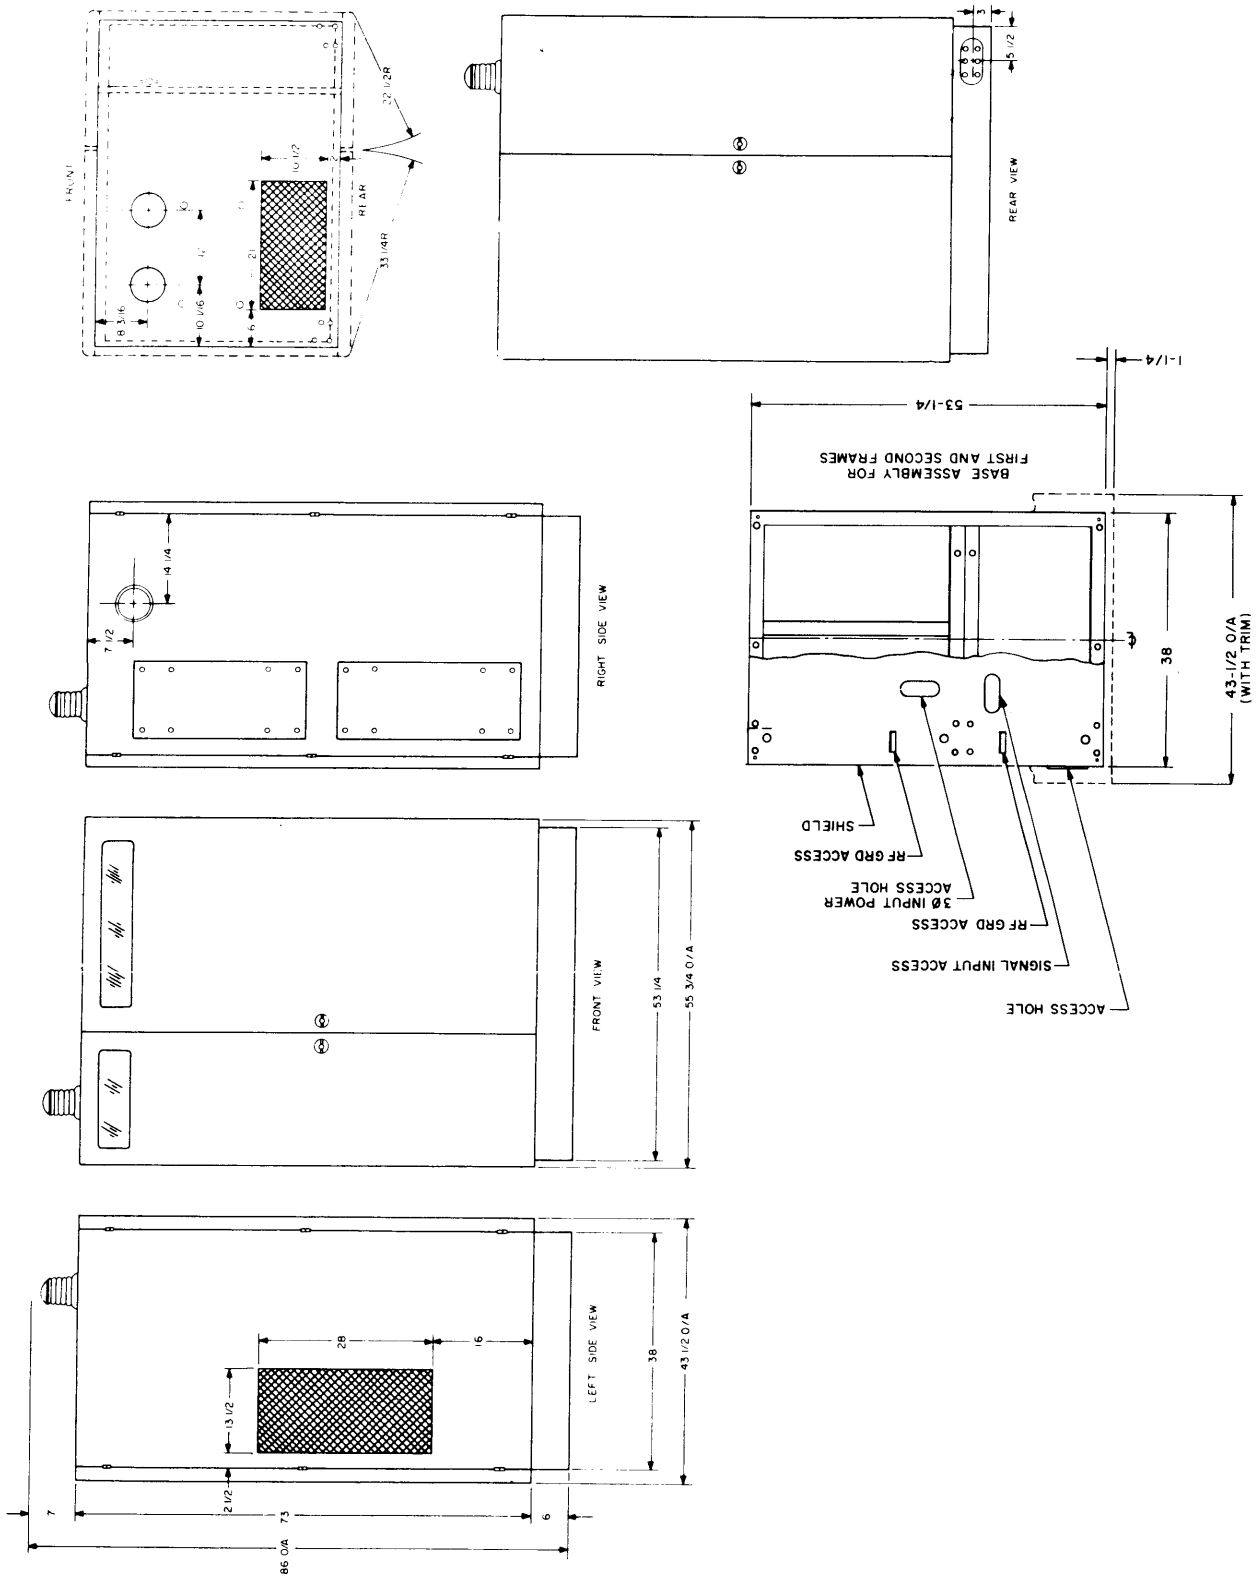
Dimensions of GPT-10KLF Transmitter, Installation Diagram
